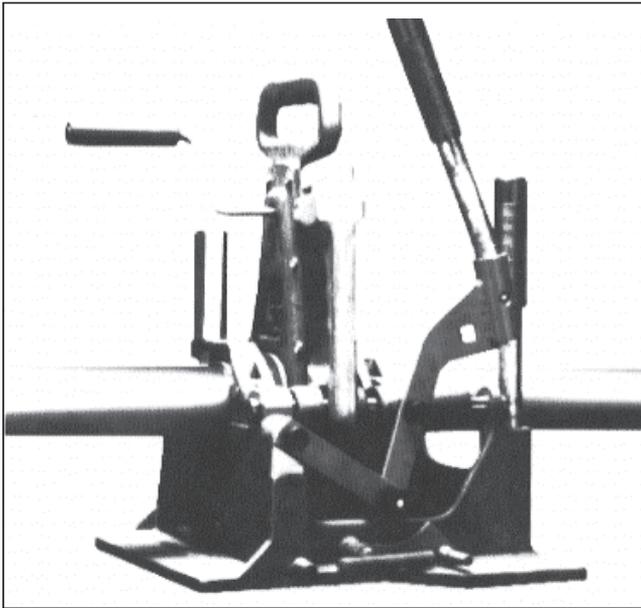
Typical Butt Fusion Machine for Smaller Diameter Pipe
